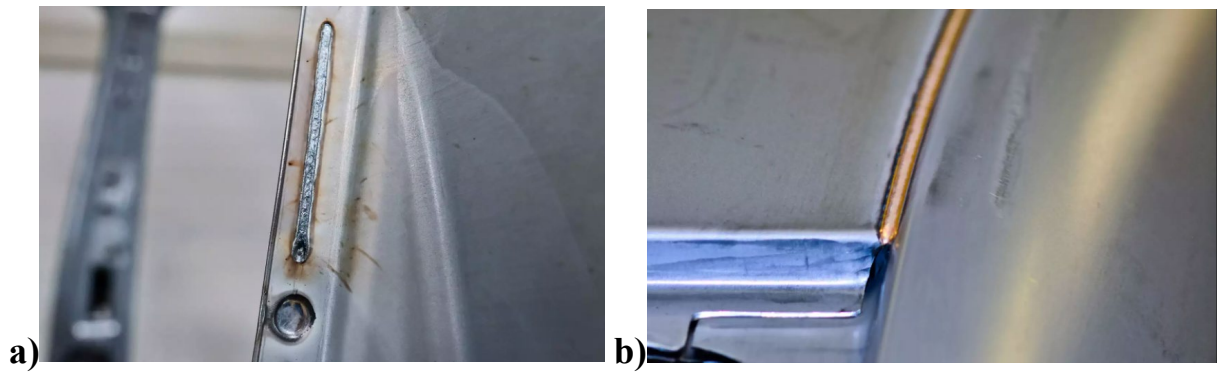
Examples of laser welded seams (a) and copper wire soldering (b) in the manufacture of a crossover Volkswagen Tiguan.
